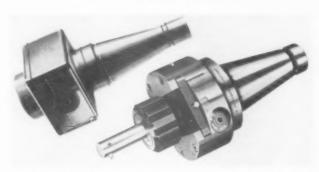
shows two typical commercial adjustable stub boring heads designed for use on production boring or with jig boring machines. The tool at left is by Wendt-Sonis, of Hannibal, Mo., the one at right by Universal Engineering Company, Frankenmuth, Mich. Both have micrometer adjustment.
